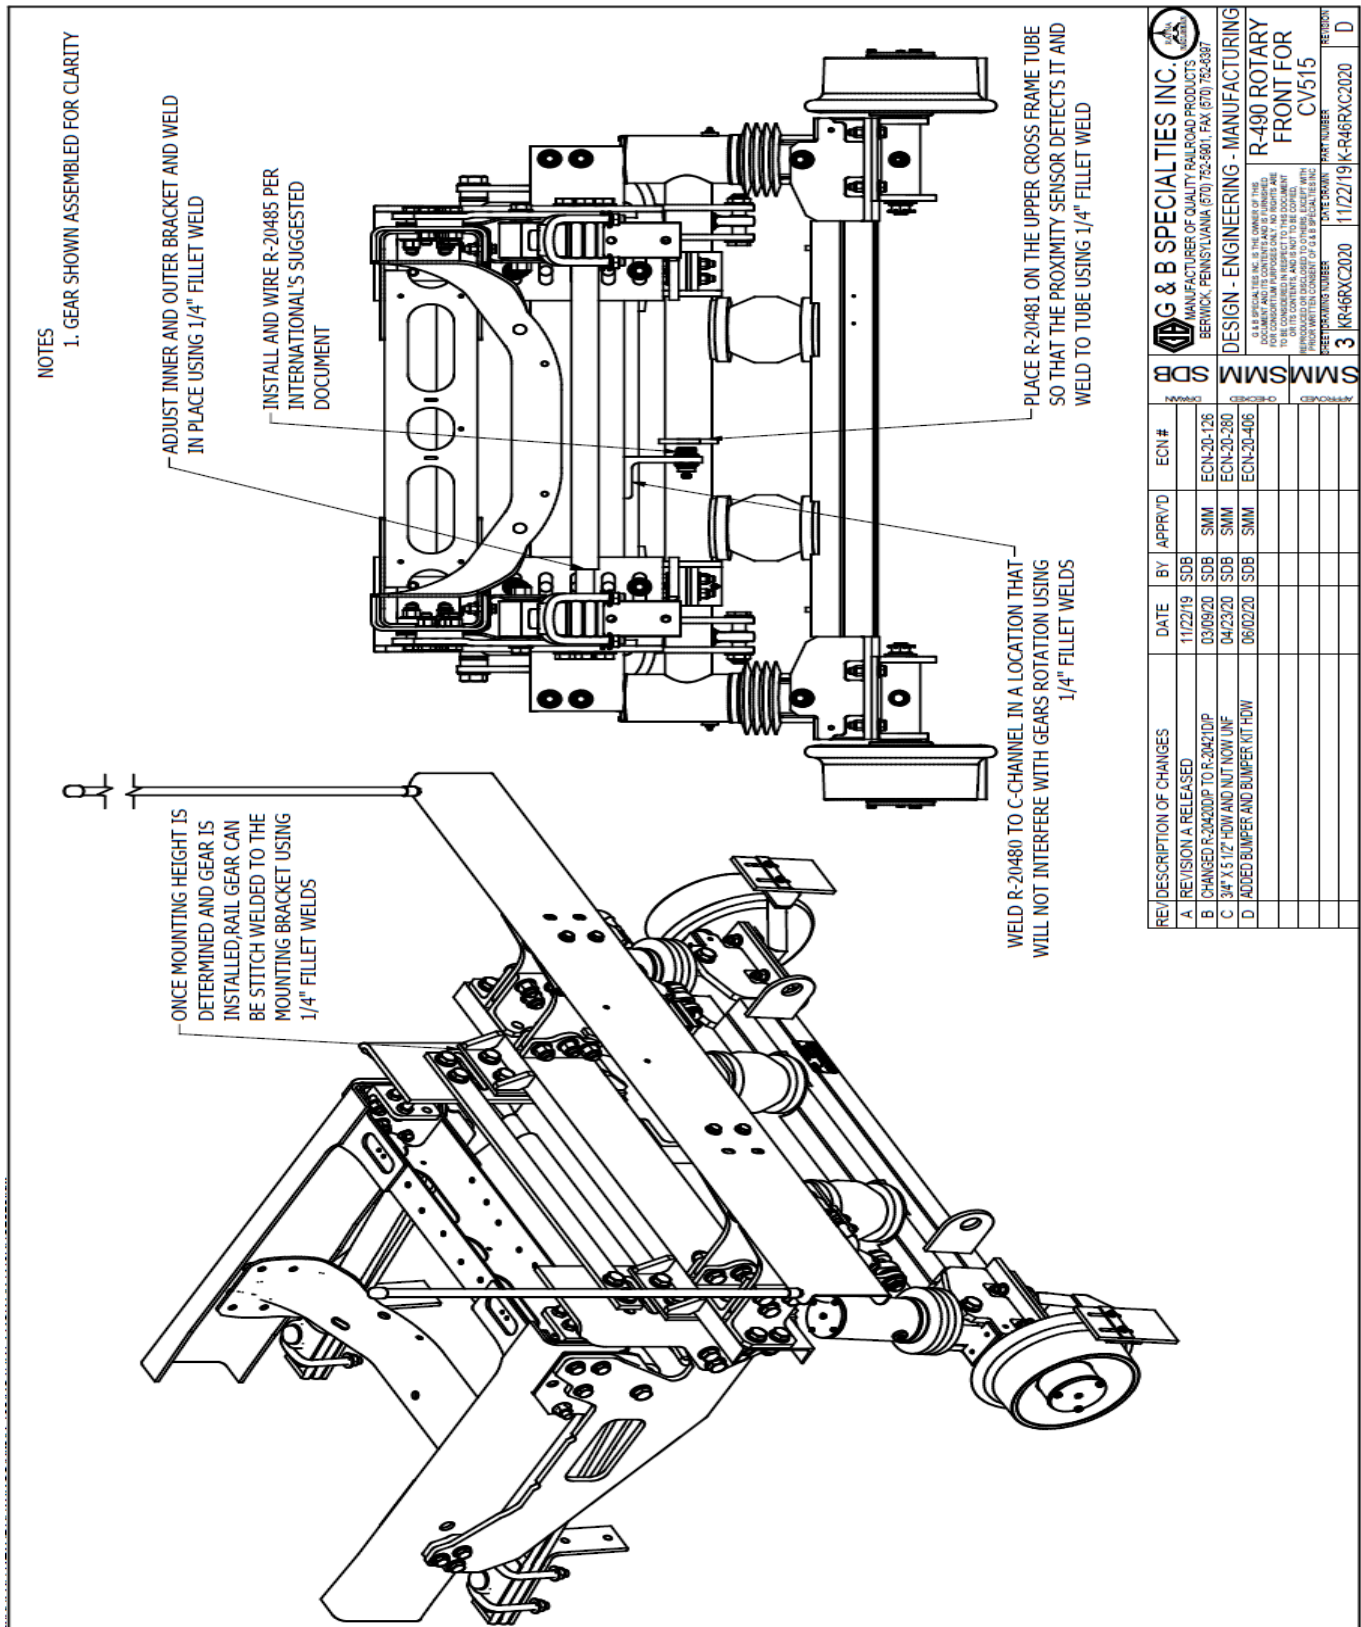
R-490 Rotary Front Railgear Complete Kit Sheet #3 (K-R46RXC2020)
